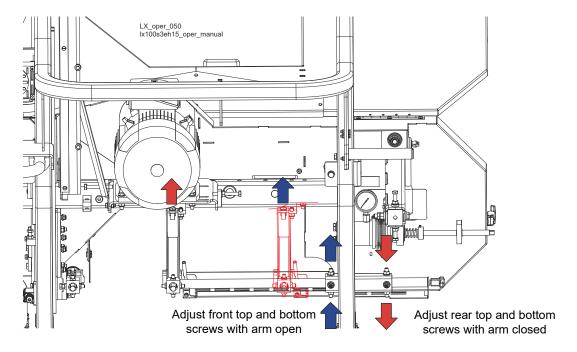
SAWMILL WITH MANUAL BLADE GUIDE ARM.
